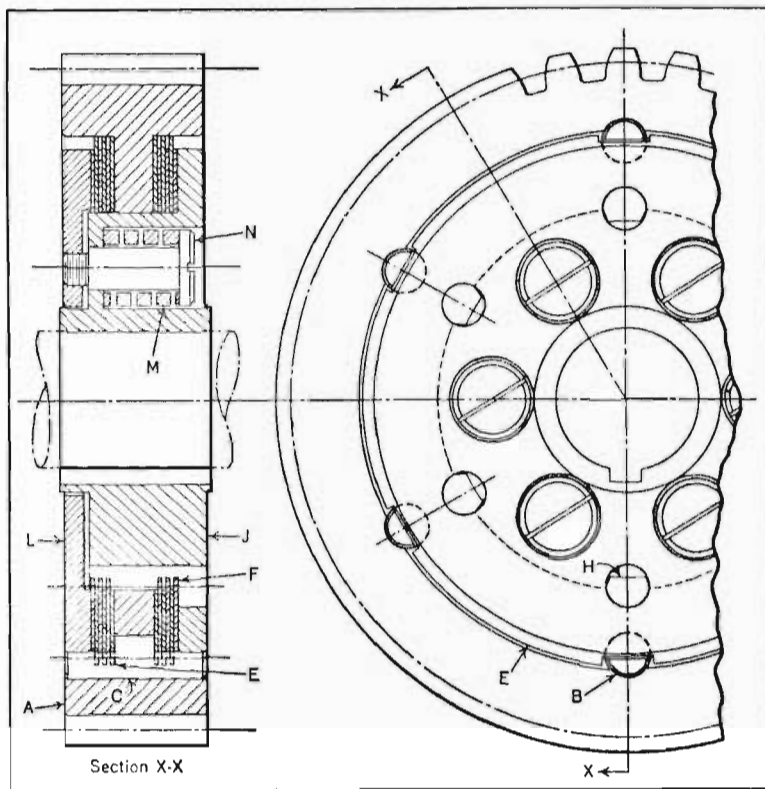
Gear Equipped with Friction Drive for Stopping the Driven shaft when Excessive Loads are Applied
